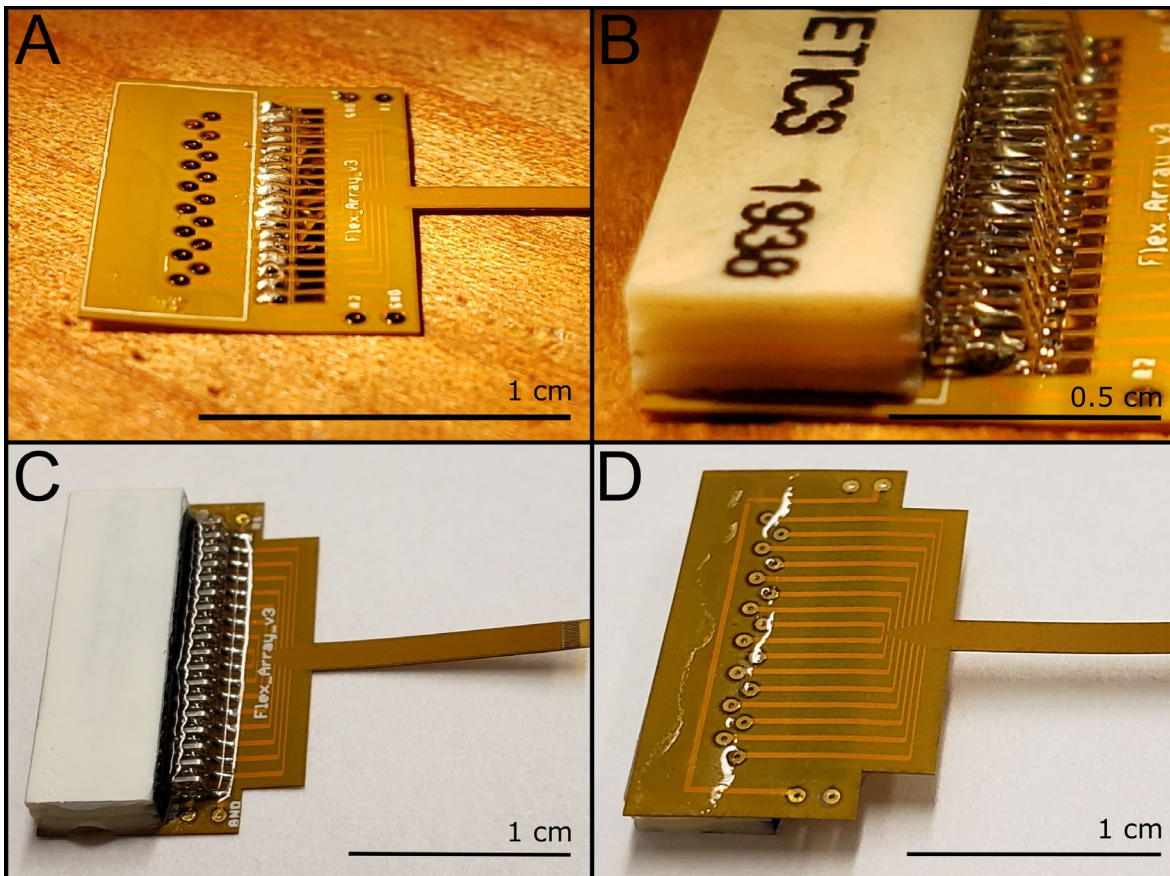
Soldering and insulation steps for the Flex Array. (A) Laying the solder for the bottom connector pins. (B) Back pins secured in place with the front pins ready for soldering. (C) Delayed set epoxy insulated Flex Array; (D) Epoxy applied to the sides of the connector.
